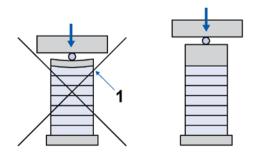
Proper dimensioning of the end pieces in the case of point contact (1: Tensile stresses)
